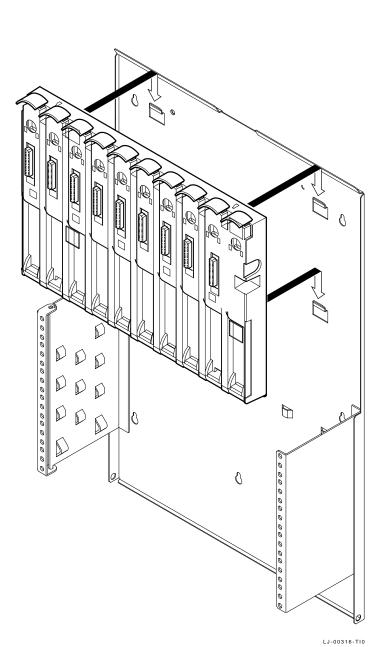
Installing the Backplane on the Wall Mount Plate
